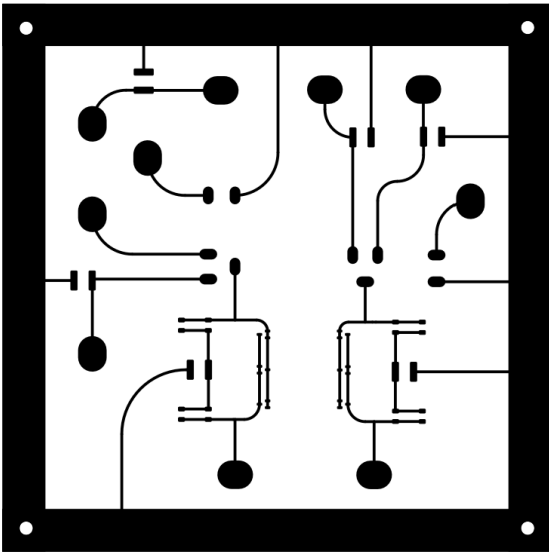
Front view of the exposed copper (black) layer of the PCB. The copper traces connecting pads to components are covered by a solder mask and the exposed copper border is grounded.
